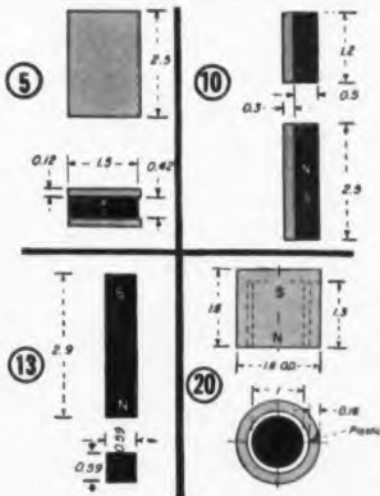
Four of the basic designs for holding magnets. From these designs other holding magnets, geometrically similar but with any desired pull force, can be derived. Magnetic material is in black, steel in gray; all dimensions are in inches. Design numbers correspond to those on effectiveness curves and in Performance Table II.
